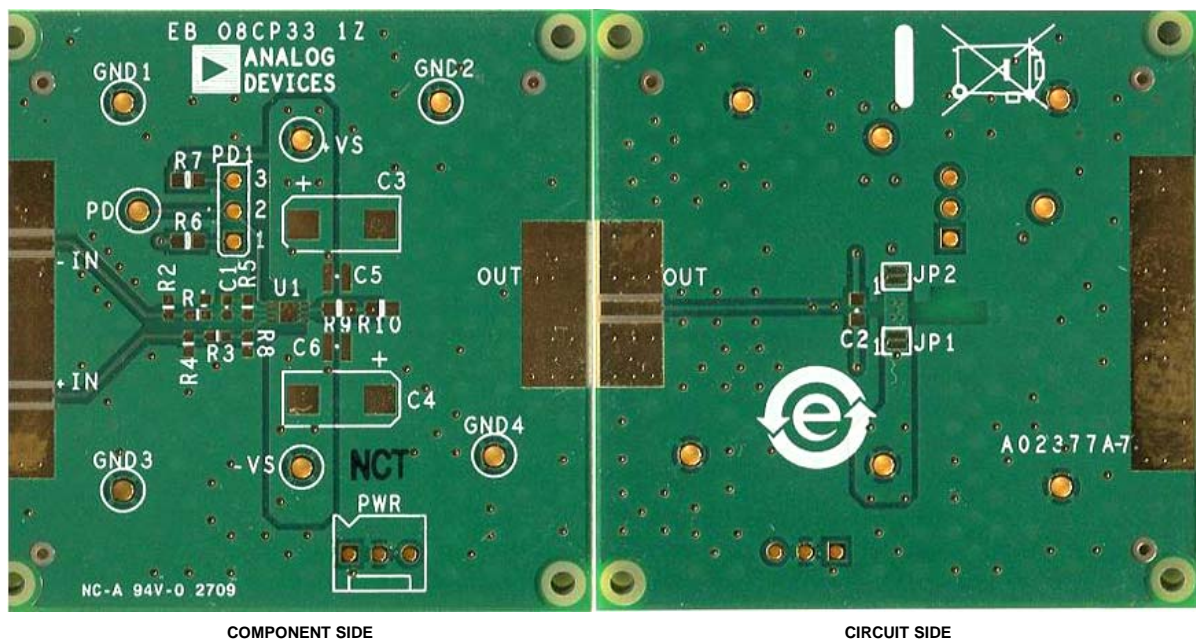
EB-O8CP33-1Z Component and Circuit Side of PCB
